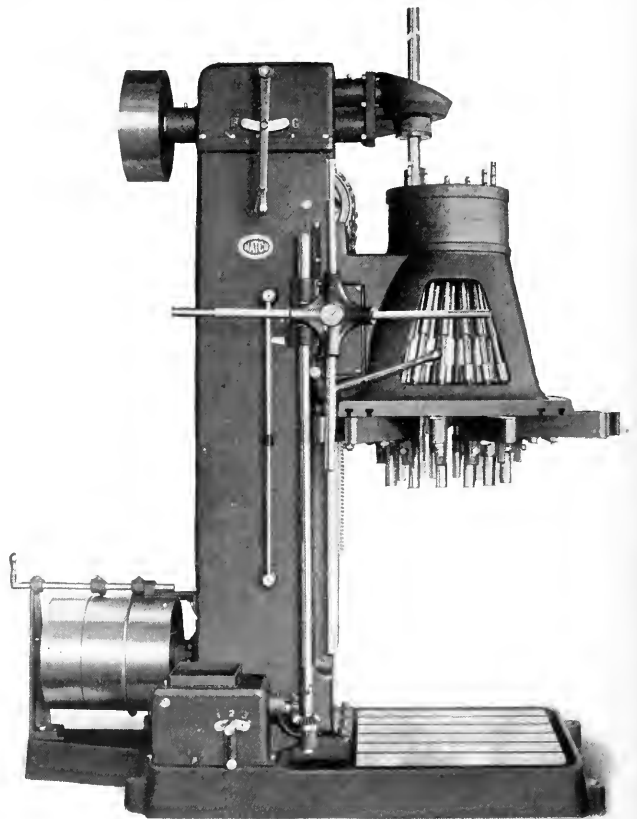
The Natco No. 26 Multiple Spindle Drilling Machine
